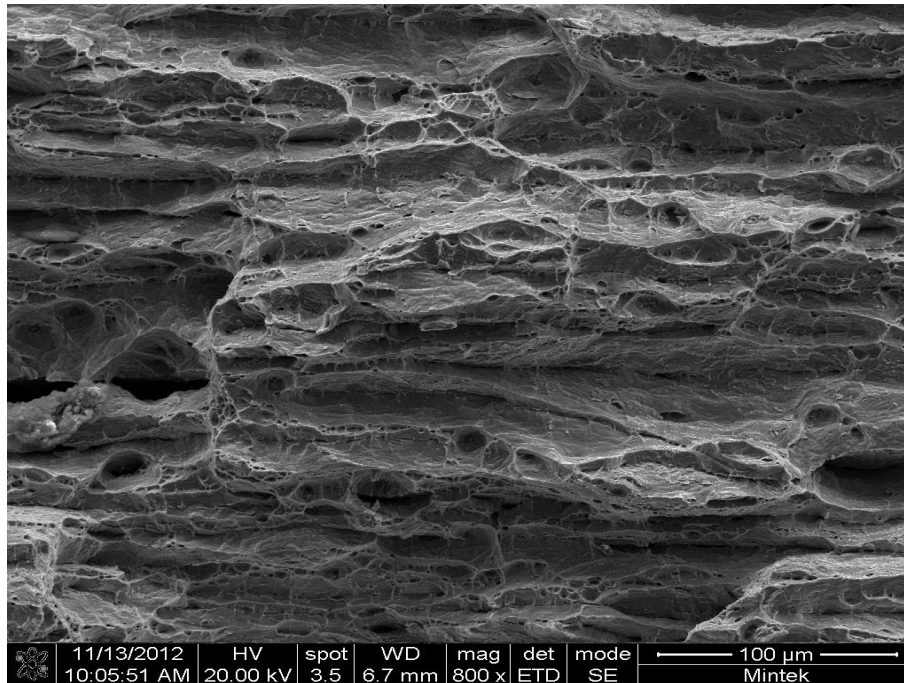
Rupture zone of AISI 316L sample carburised at 550°C showing ductile dimples with lineal pattern to fracture.
